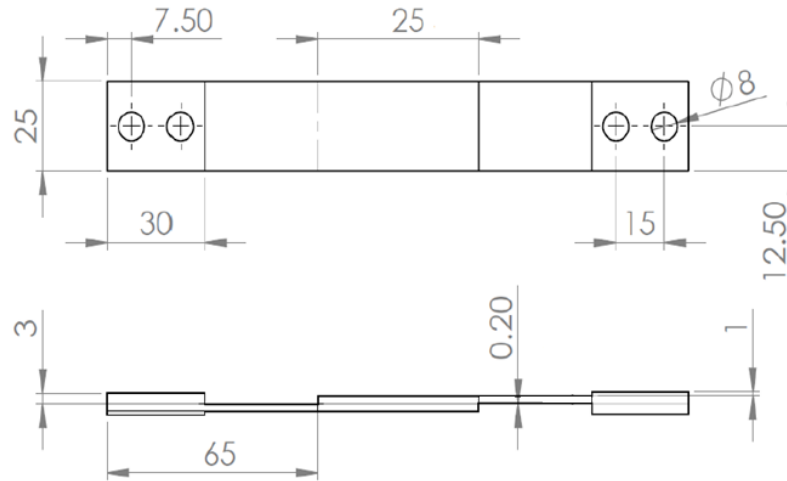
Geometry of SLJ specimens (dimensions in mm).
